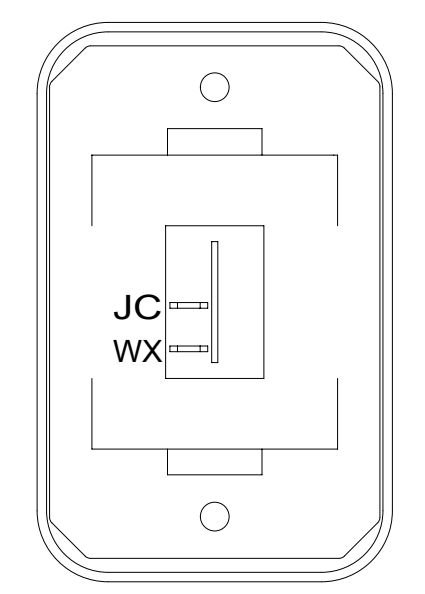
CHT SCREW G11-06-10U (4)
